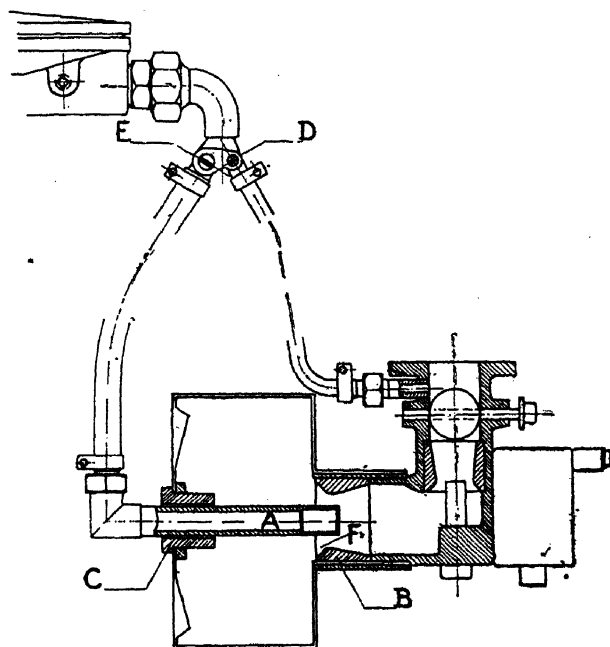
Coal Gas Carburettor for High Pressure Gas Supply System.
